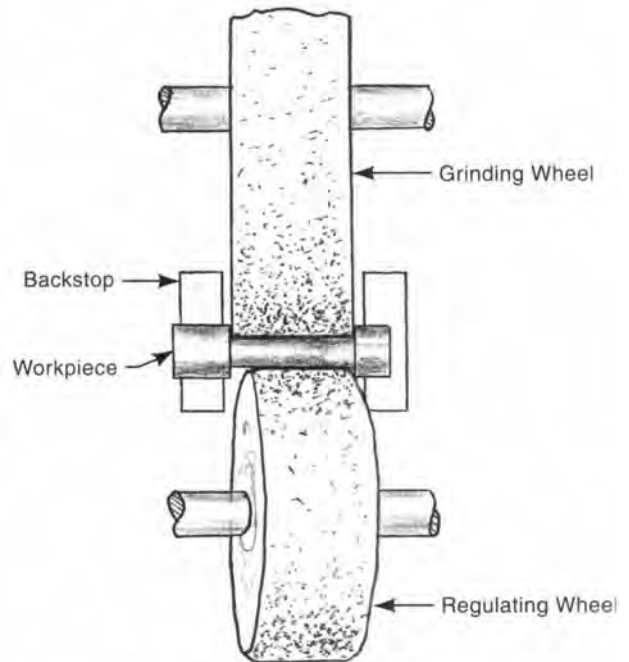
C1b2 Infeed centerless grinding. The method is used when a portion of the workpiece is larger than the ground surface. The workpiece is placed in position; the grinding wheel is fed into the work; the wheel retracts after grinding and the workpiece is removed or ejected.
